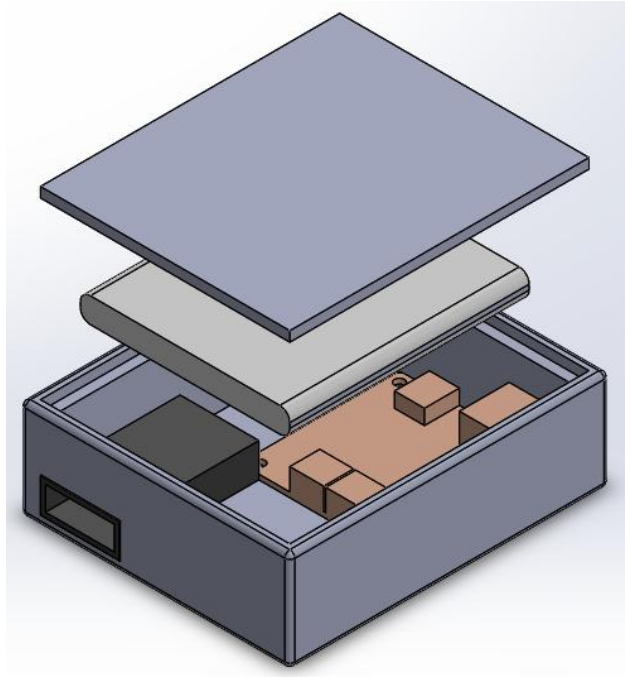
Electronics pack enclosure, circuit board, USB connector, and power connector.
